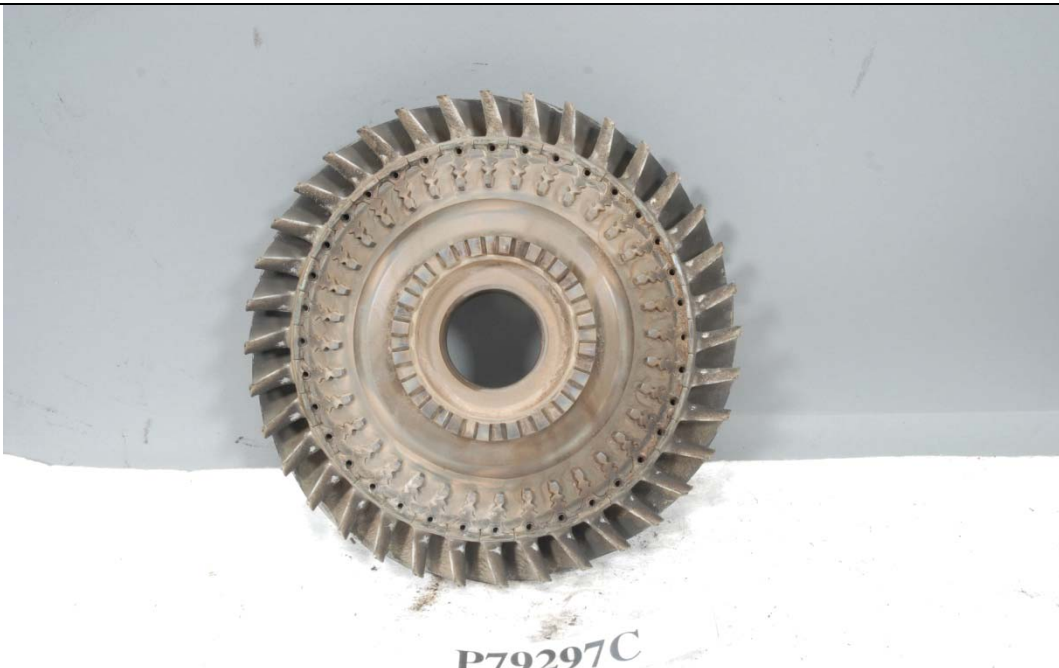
P-79297C, First-Stage Turbine Stator Assembly, Earthen Debris
